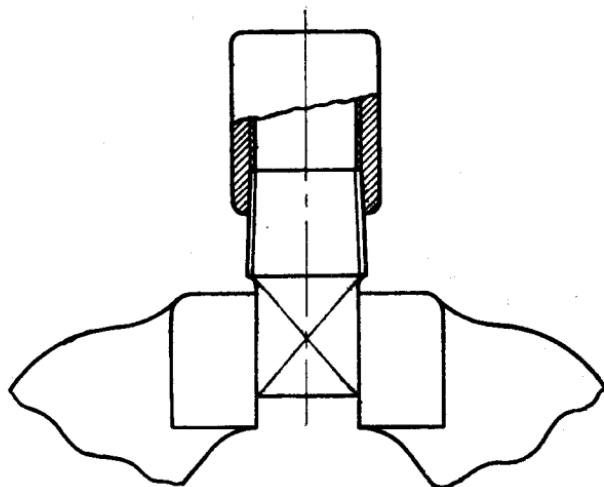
MECHANICAL EXPANSION TEST ON SOCKETS
